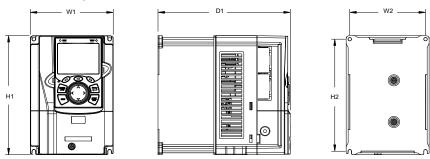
Wall mounting diagram for 380V 1.5-37kW models
